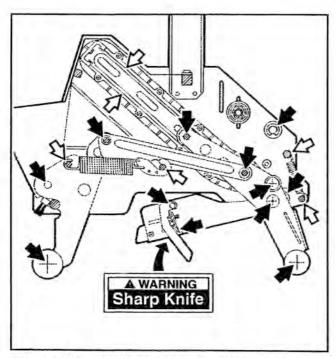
Lubrication Points, Upper and Lower Taping Heads
